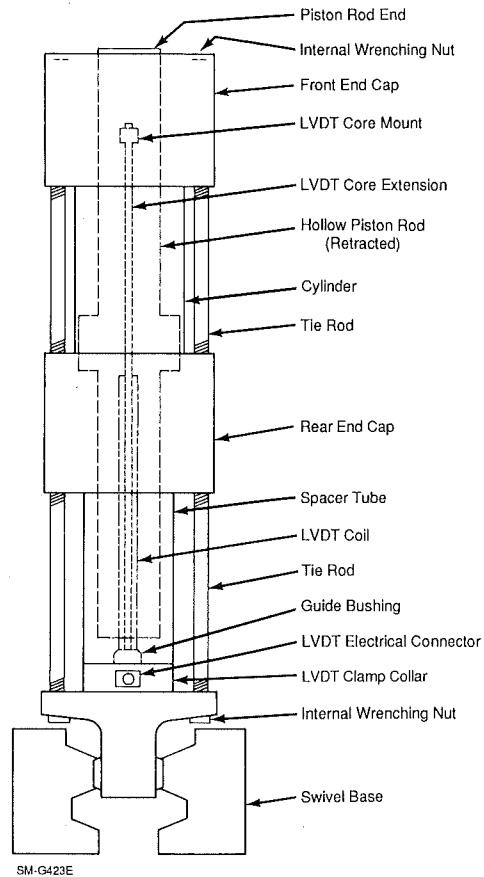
Closed Housing LVDT – Swivel Base Illustration
